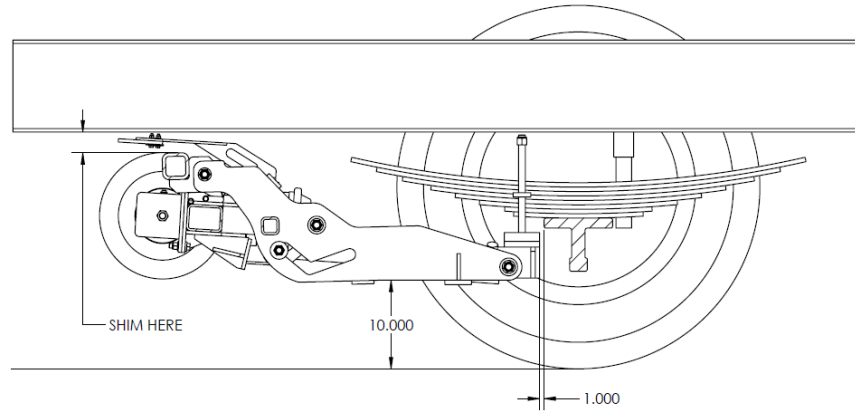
Cam at 10" and parallel to the ground and spring hangers set 1" in front of the axle. In this figure the mounting beam is oriented towards the front of the chassis.
